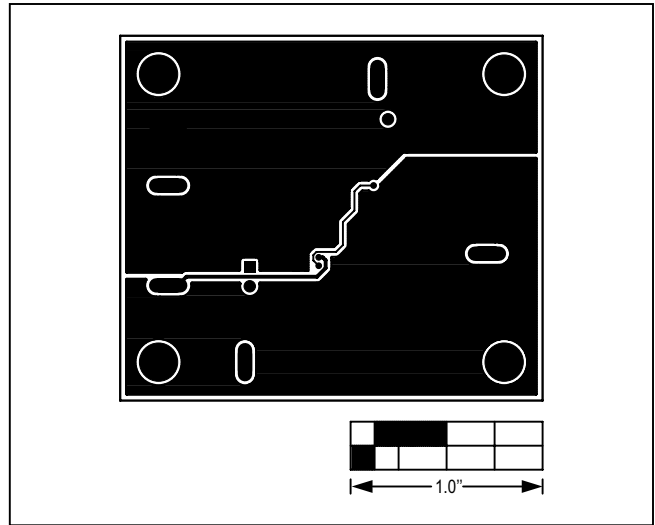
MAX17502HU EV Kit PCB Layout—Solder Side
